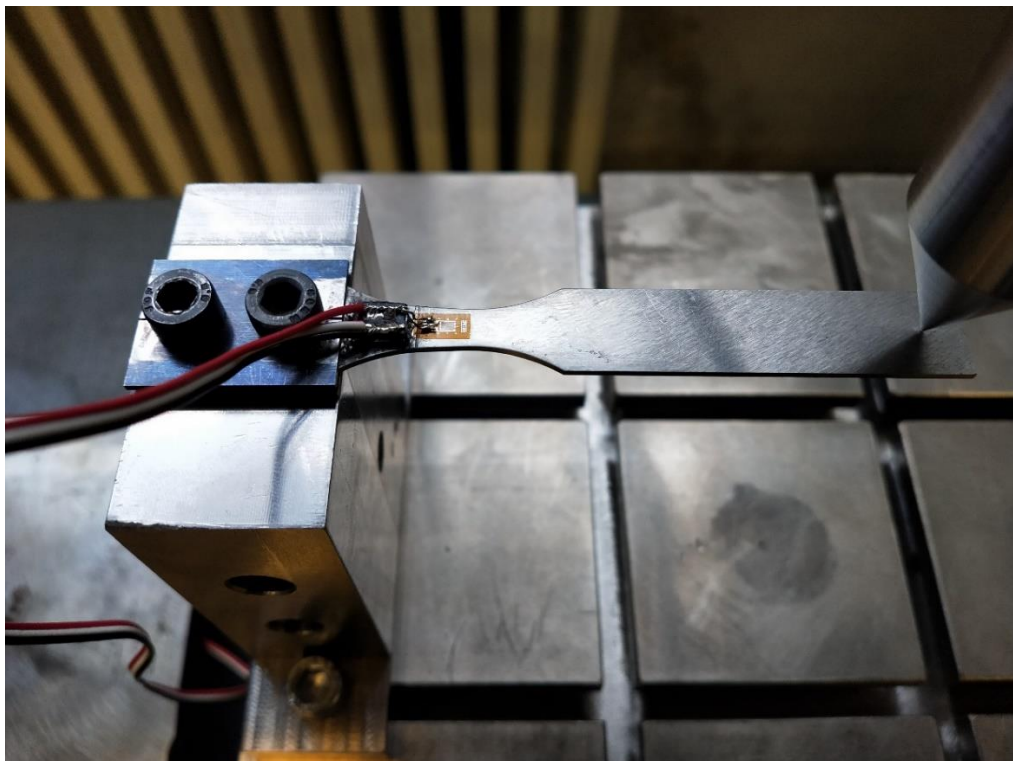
Dynamometer Test of Fatigue Specimen
